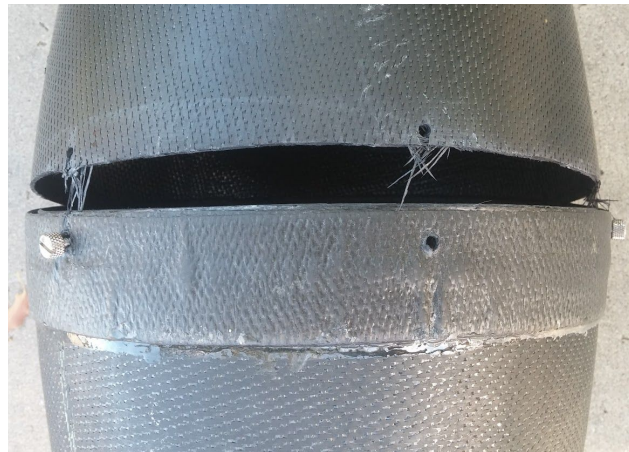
A close up view of the failure is shown. Four of the six bolt holes sheared during the side impact.
